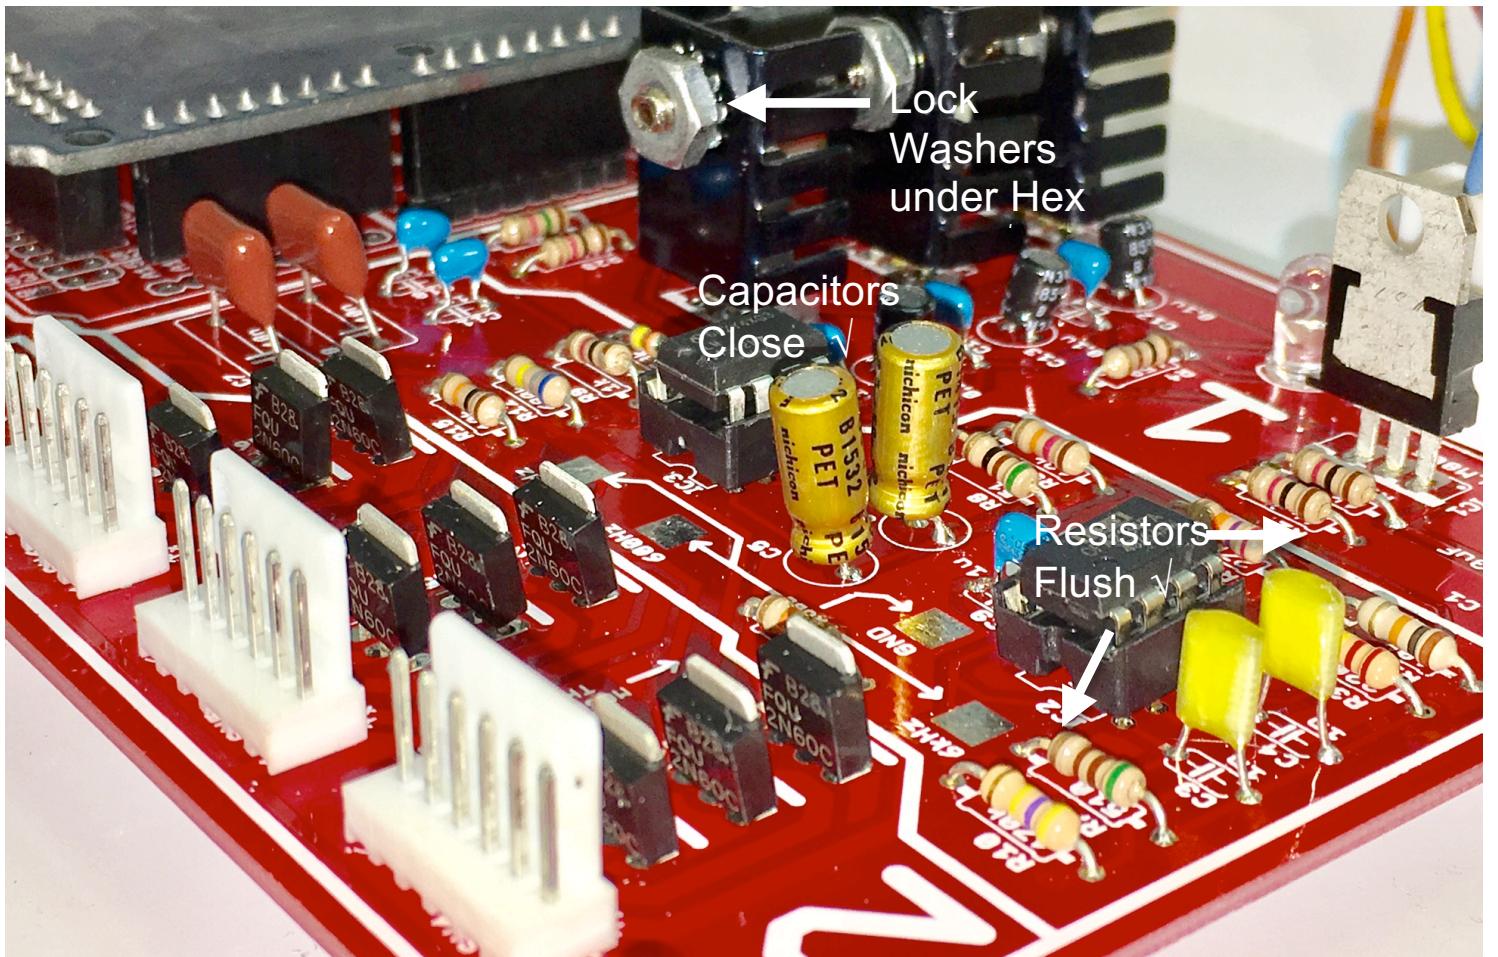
Examples of component placement against PCB surface and correct heat sink hardware installation.
